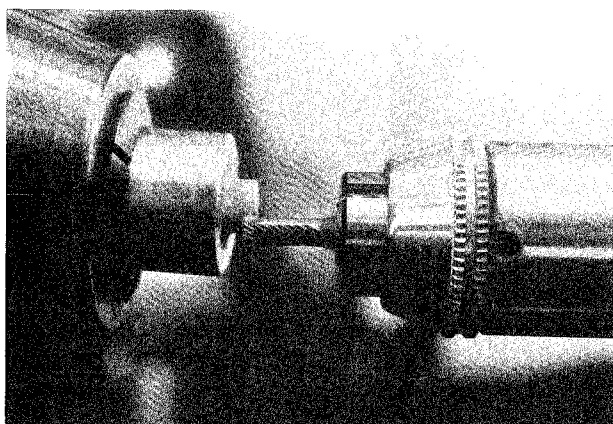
Specimen chucked in lathe with attached high-speed grinder
